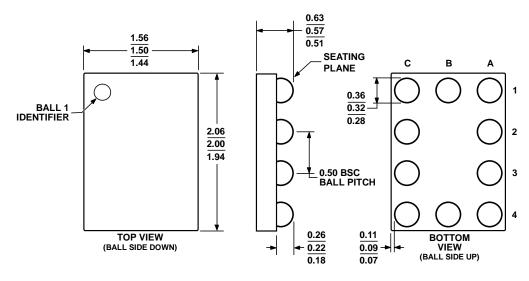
10-Ball Wafer Level Chip Scale Package [WLCSP] (CB-10) Dimensions shown in millimeters
